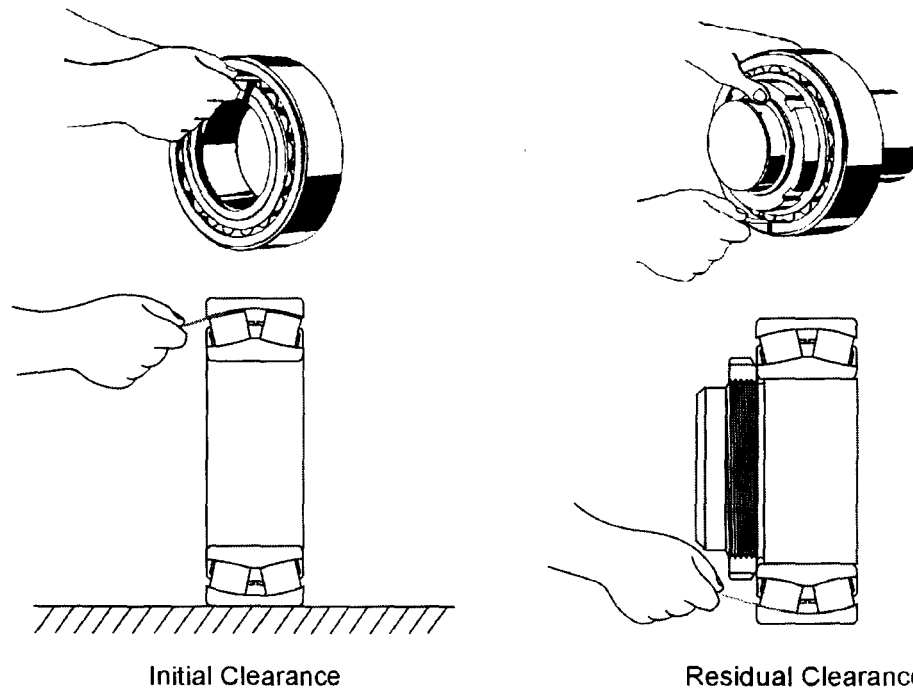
The internal clearance on a cylindrical bore spherical roller bearing
